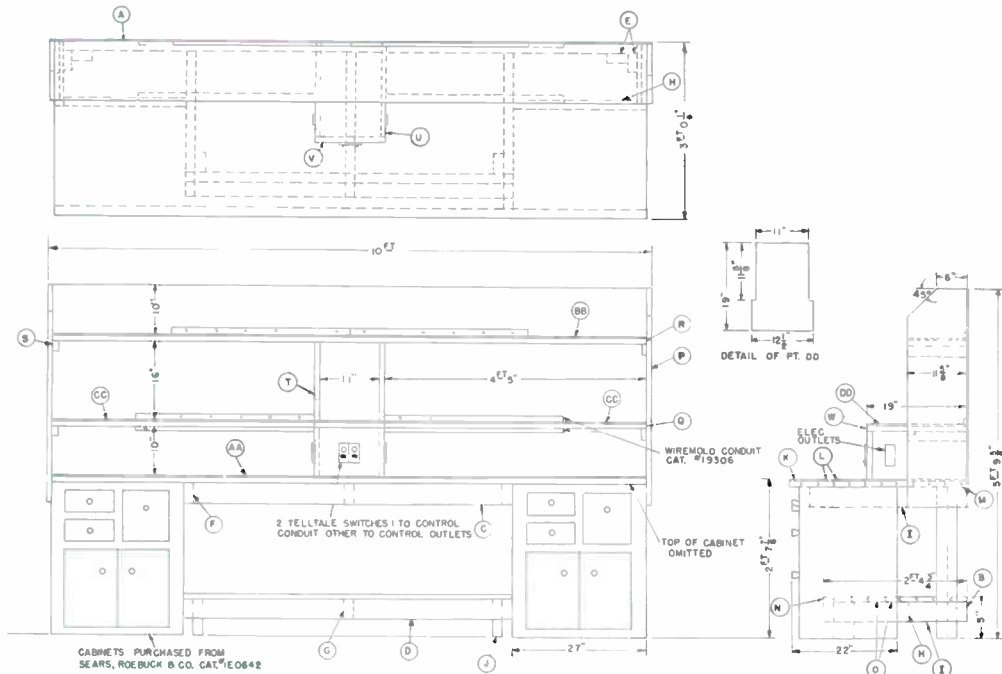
Detail drawing of Service Bench with side cabinets showing location of parts listed under bill of materials.
